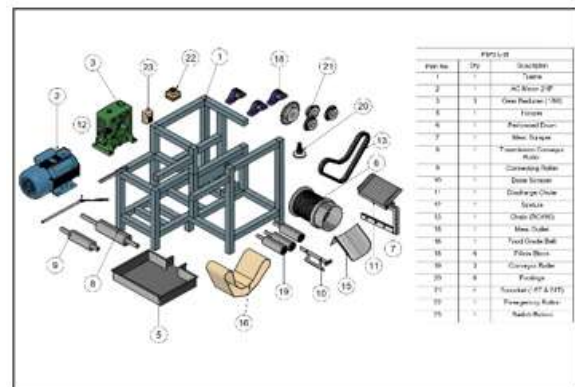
Exploded View of the Semi-Automatic Deboning Processing Machine
